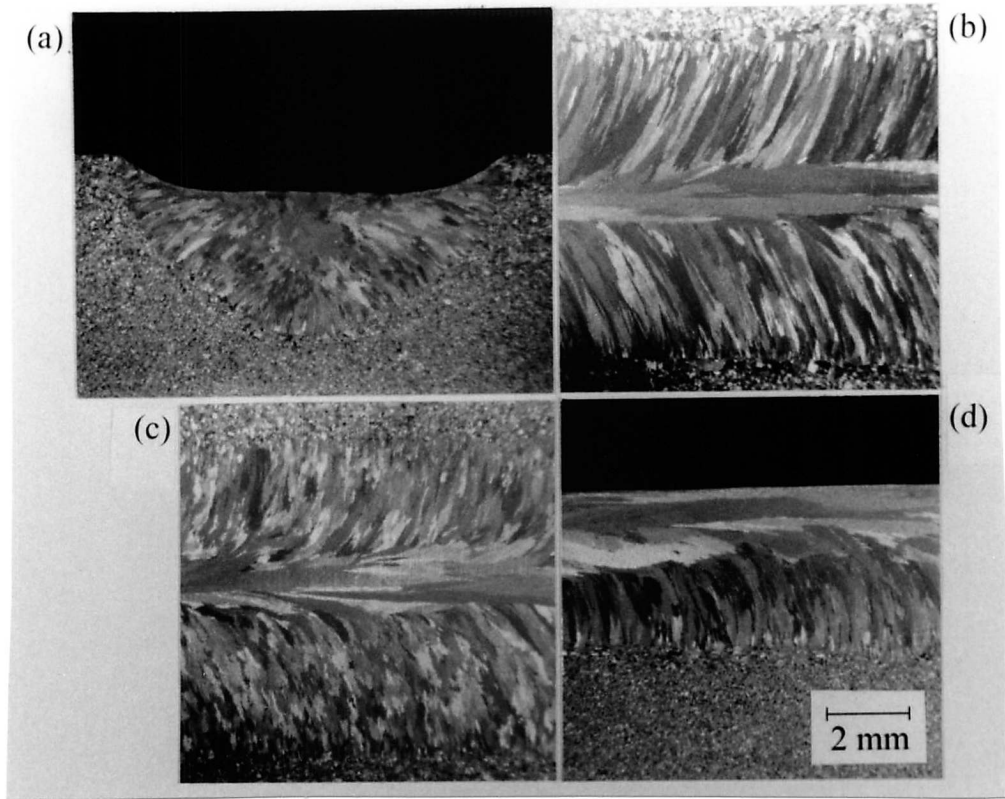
Comparison of microstructures resulting from high and low welding speeds. (a) At low welding speeds the weld pool is elliptical and axial grains can grow from the pool tail. (b) The teardrop shaped weld pool at high welding speeds prevents axial grain formation.
